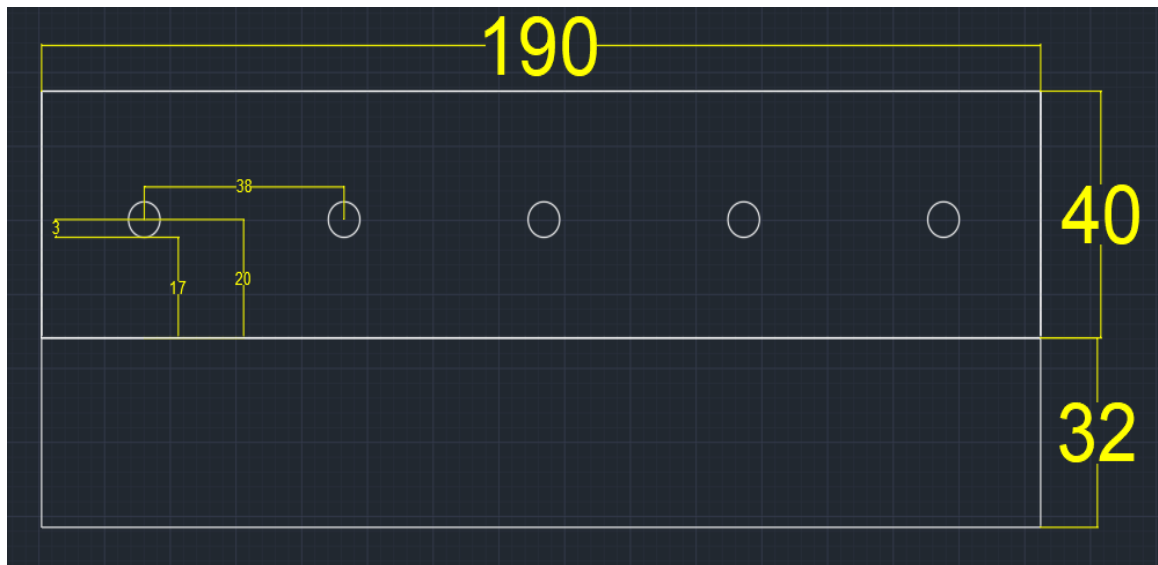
2D Front view of a portion of Laser diode holder with dimensions. Image provided by the Lazer Pong project team.
